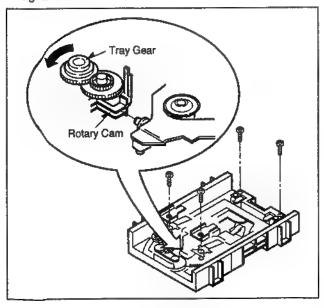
Setting of the Traverse Unit and the Rotary Cam
